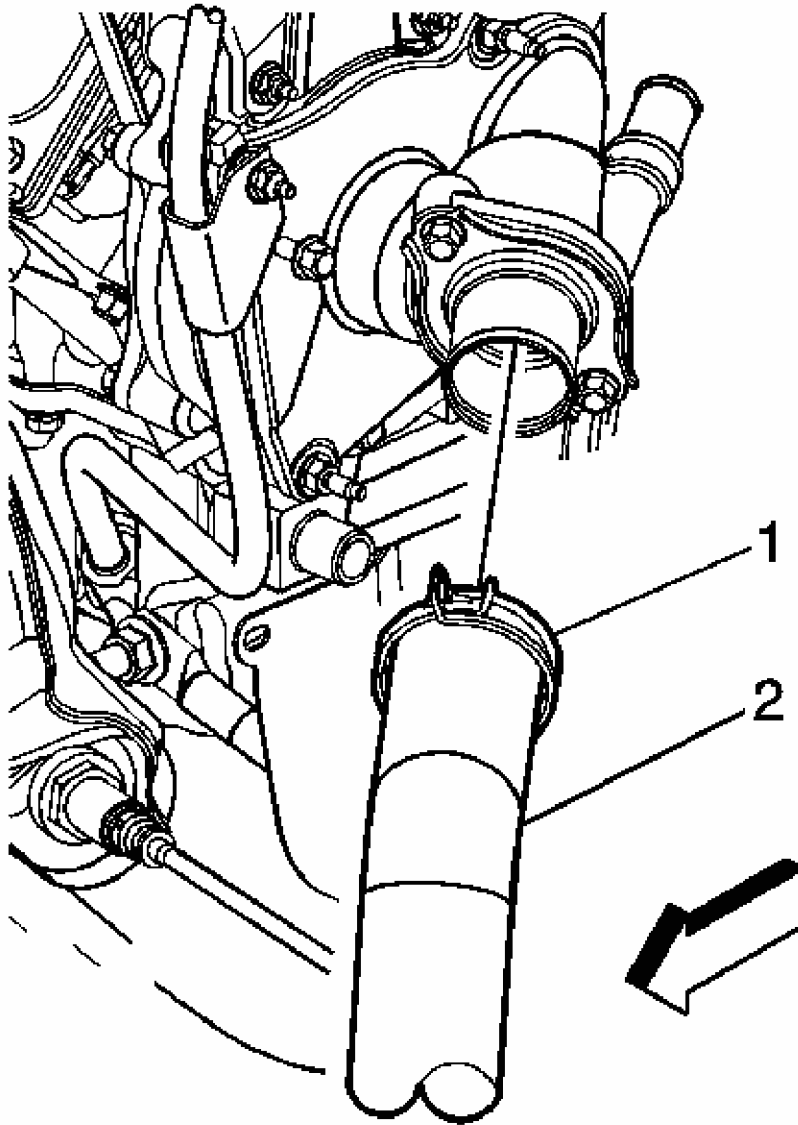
View Of Radiator Outlet Hose At Thermostat Housing
